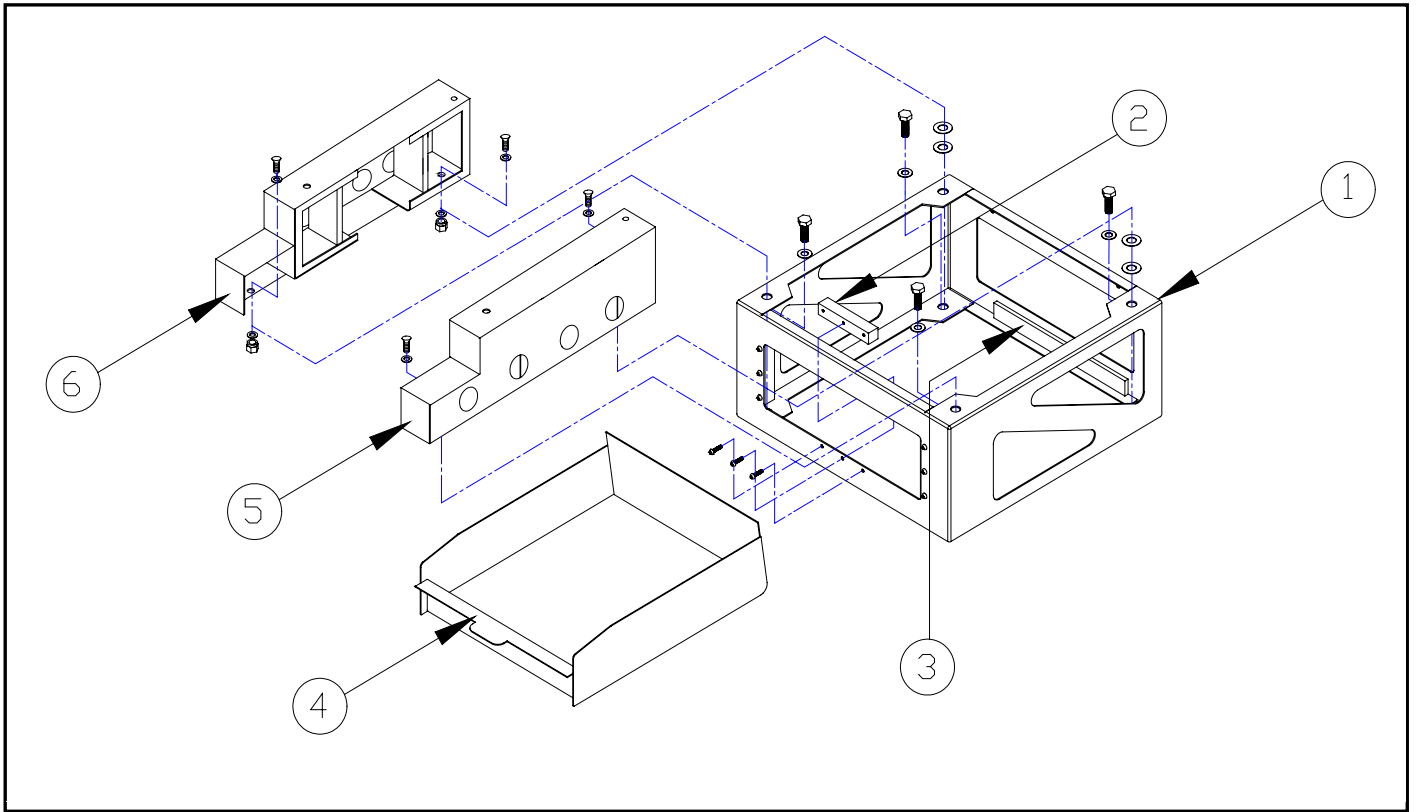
DRIVER SIDE FIXED FRONT SEATBASE
